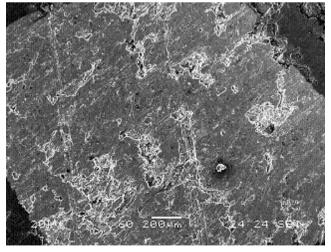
SEM image of the surface of drilled hole (speed 160 rpm/feed 0.315 mm/rev,  $\times 60$ )
